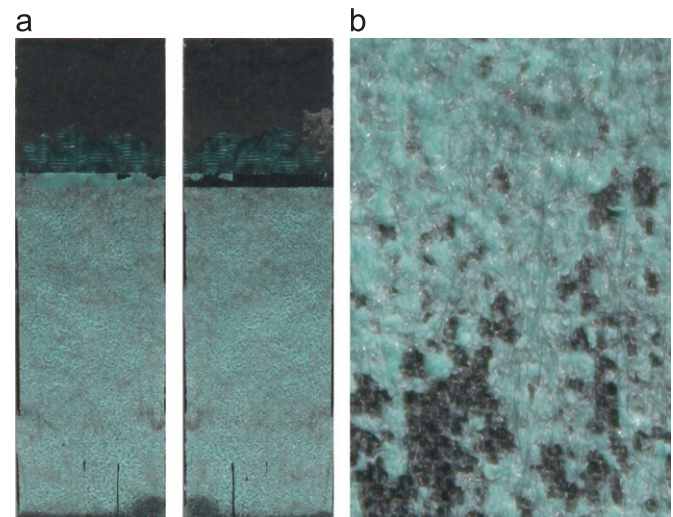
Photographs of the fracture surfaces; specimen 3 (a) and detail of specimen 13 (b).
